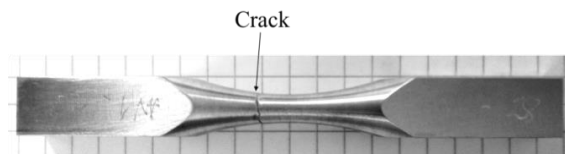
AV1 specimen showing that the fatigue crack is not necessarily located in the center of the specimen
